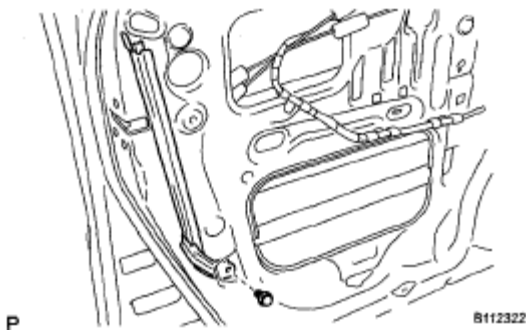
Identifying Front Door Frame Sub-Assembly Bolt
